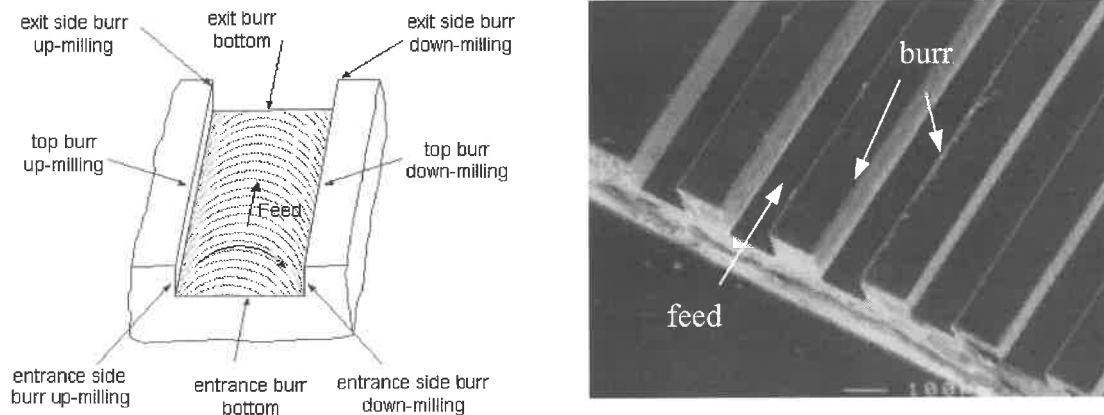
Burr definition and its location in slot milling (left) and machined slots (right)
